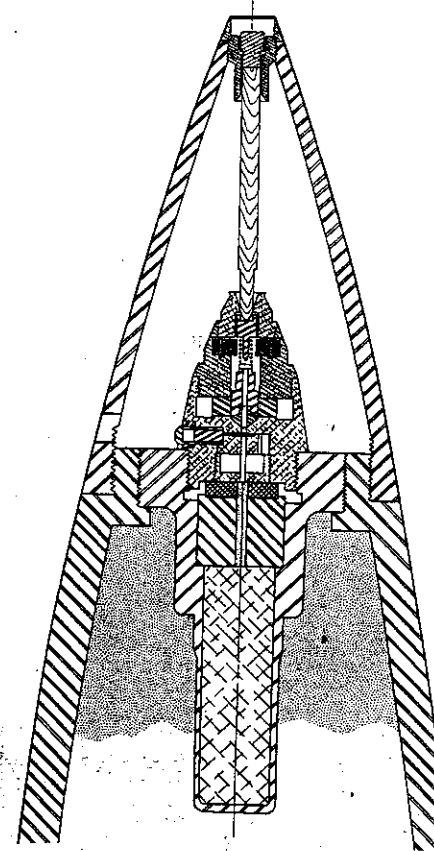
Detail of nose assembly of 21-cm HE projectile.
